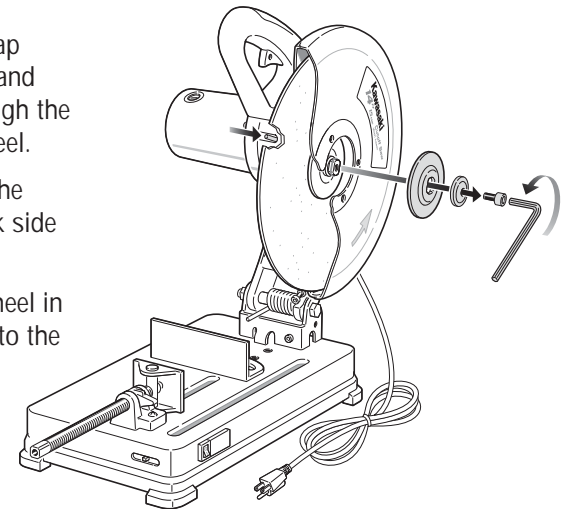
REMOVING/INSTALLING THE CUTTING WHEEL
